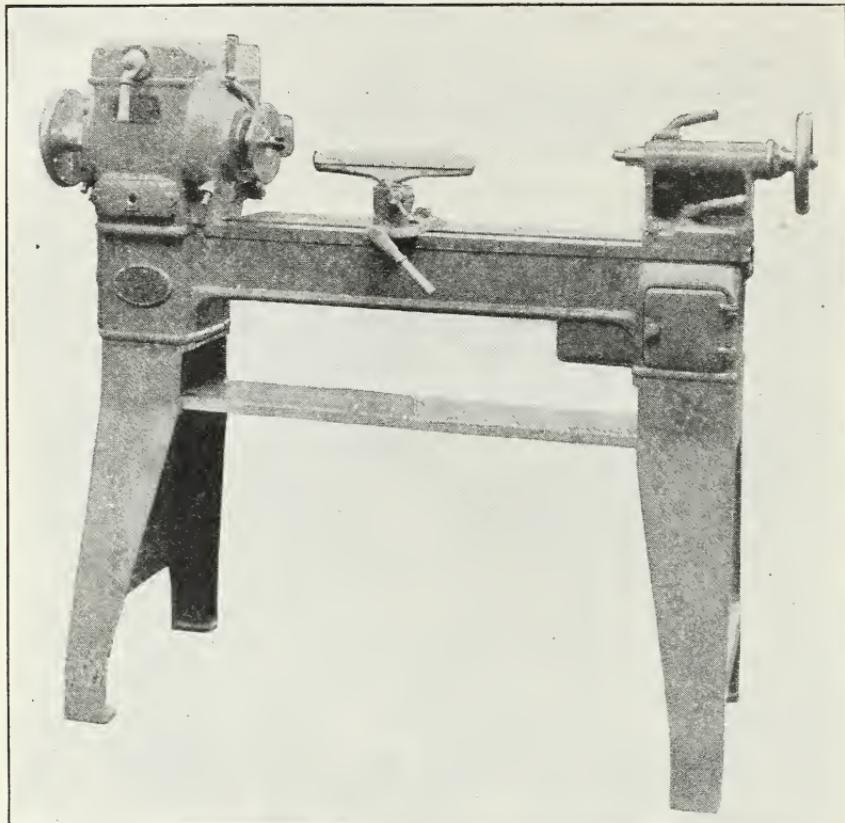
A patternmaker's lathe suitable for dimension-stock manufacture.
